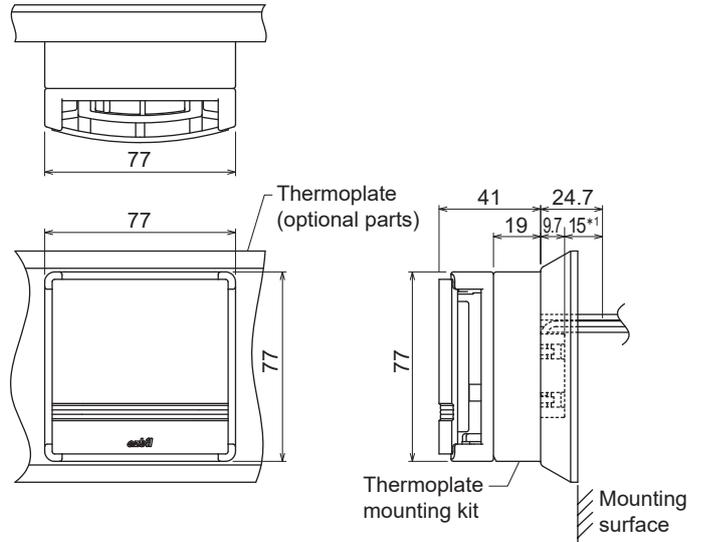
Dimensions when mounted on the Thermoplate mounting kit (mm)
